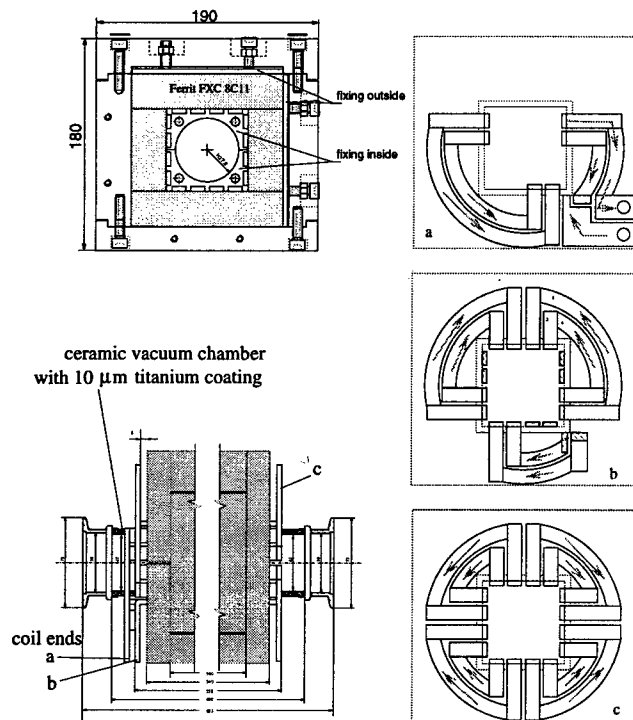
Design of the tune jump quadrupoles: the end cap design consisting of three layers (right), sectional and side view of the magnets (left).
